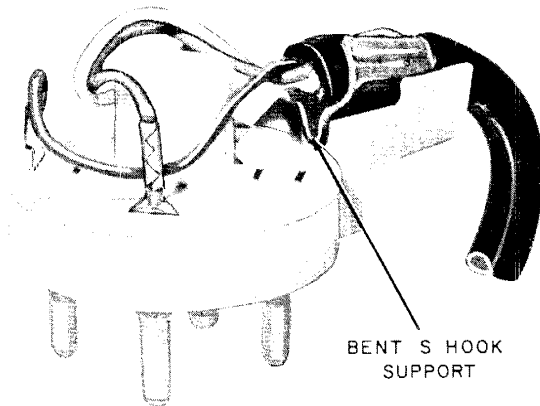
Early Model D3BU Cord Connected to 505A Plug
